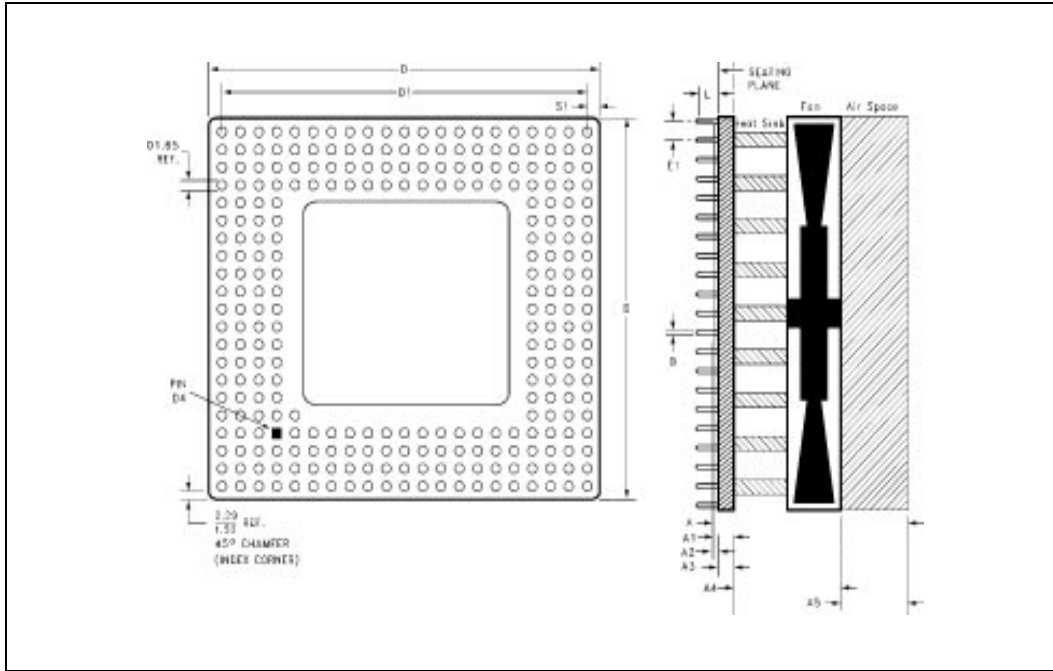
120/133-MHz Pentium® OverDrive® Processor Package Dimensions
